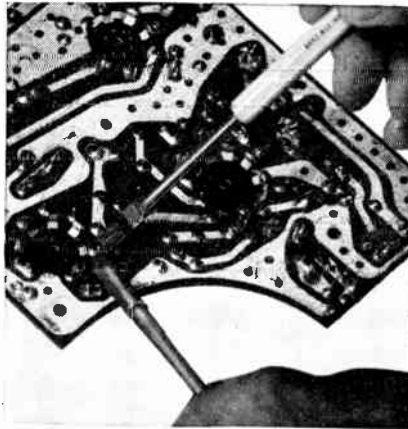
Preparing to remove a socket from a printed circuit. The solder is melted with a small iron and cleaned off quickly with a small stiff brush. (General Electric Photo)
